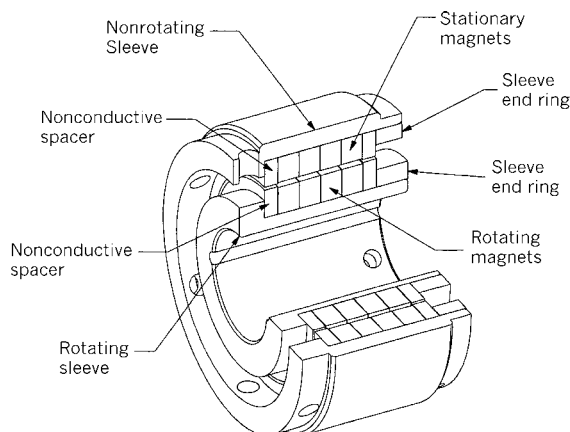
Sectioned view of permanent magnetic bearing assembly. There are two of these assemblies attached to the rotor.
